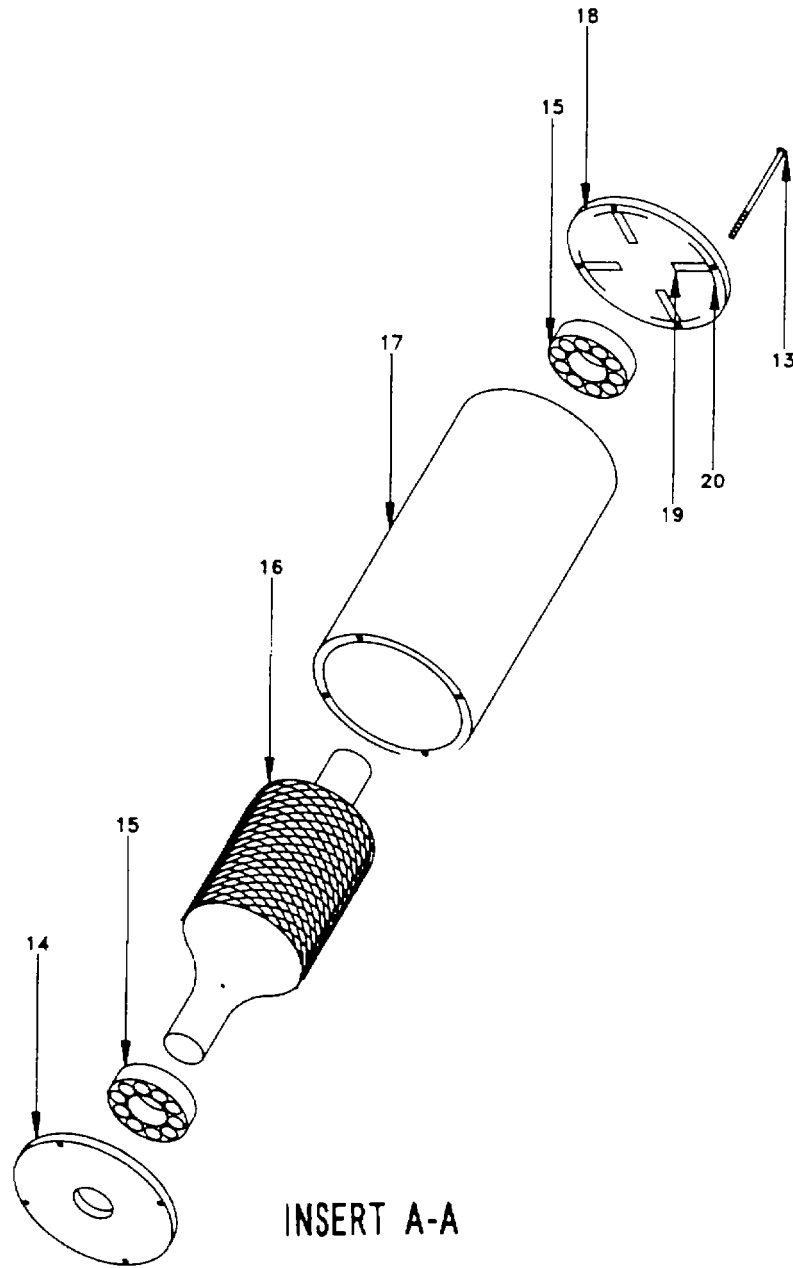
Motor And Pump Assembly (Page 2 Of 2)
